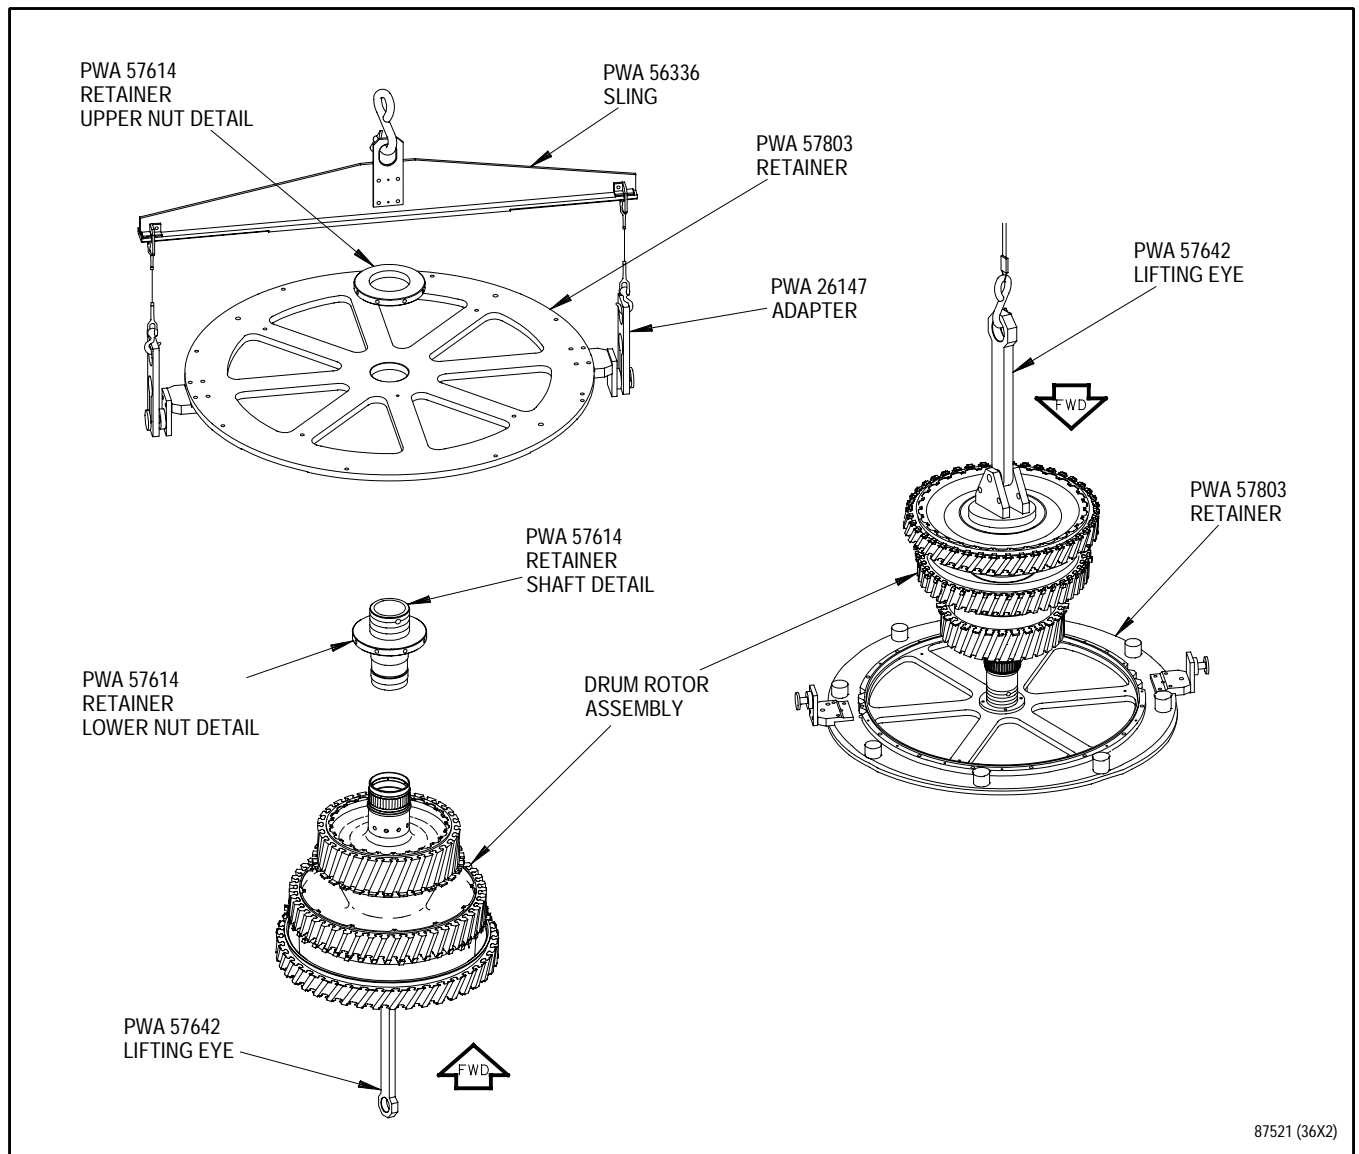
B. Figure 1B. Drum Rotor Assembly - Positioning to Front End Down
